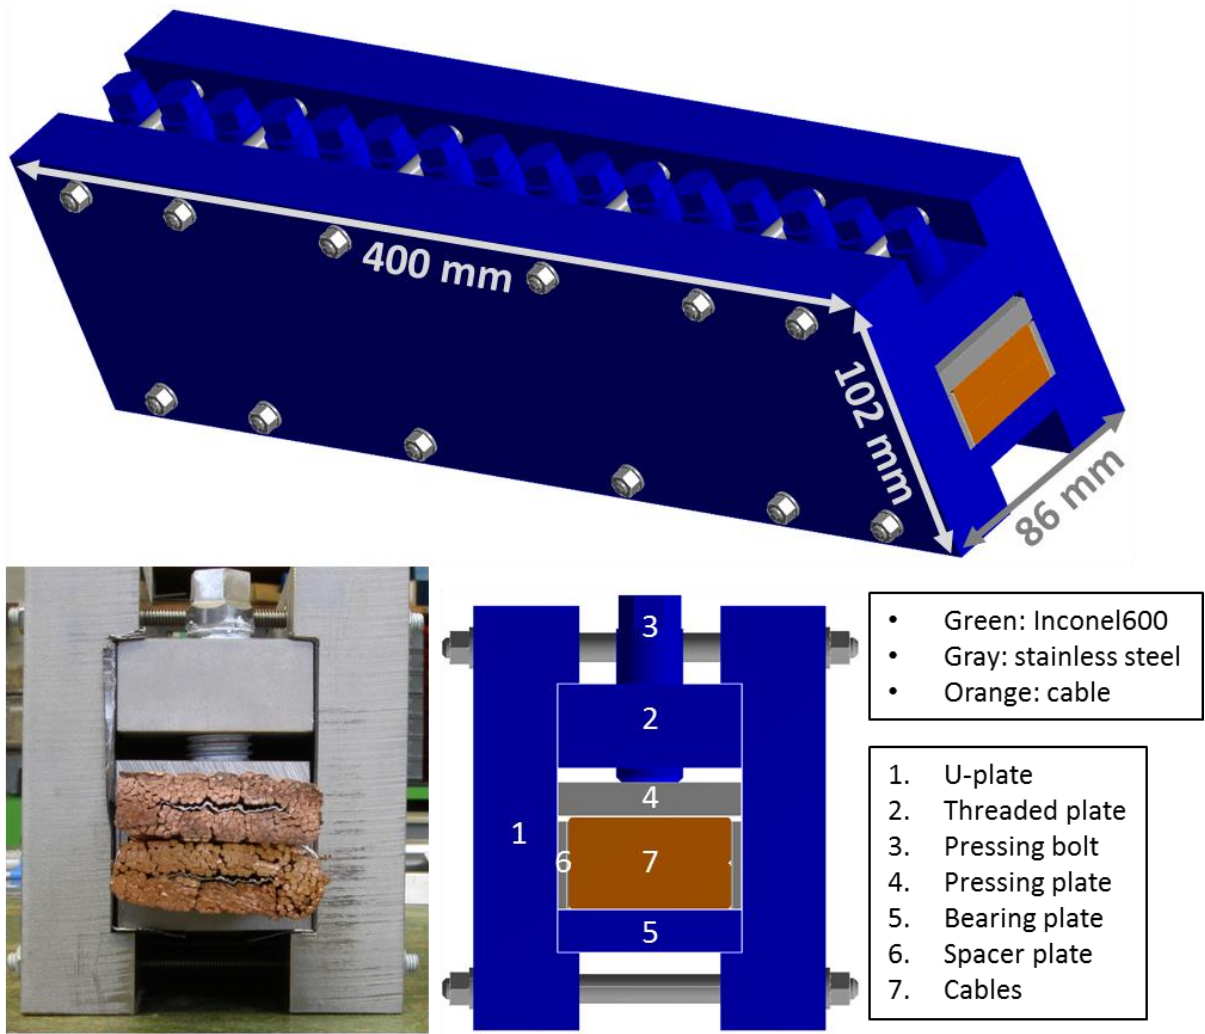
Clamping fixture for the diffusion-bonding of RW2 cables.
